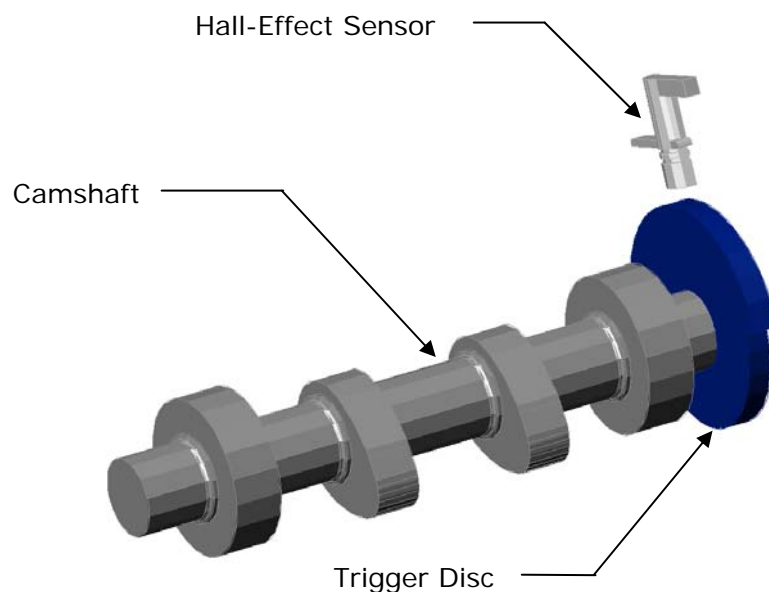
Arrangement of camshaft's trigger wheel and position sensor.
